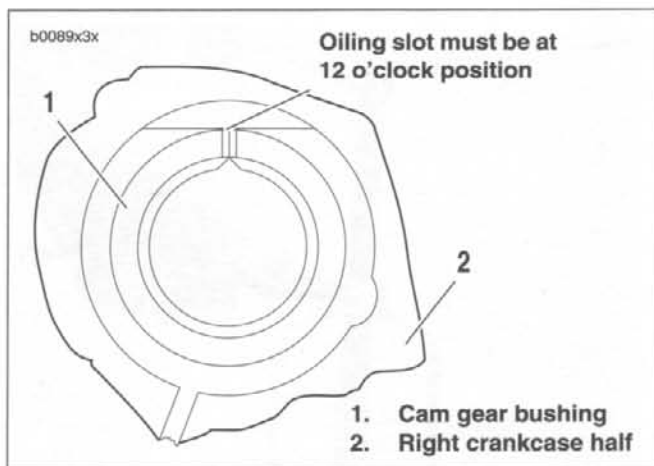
Cam Gear Bushing Installed in Crankcase
